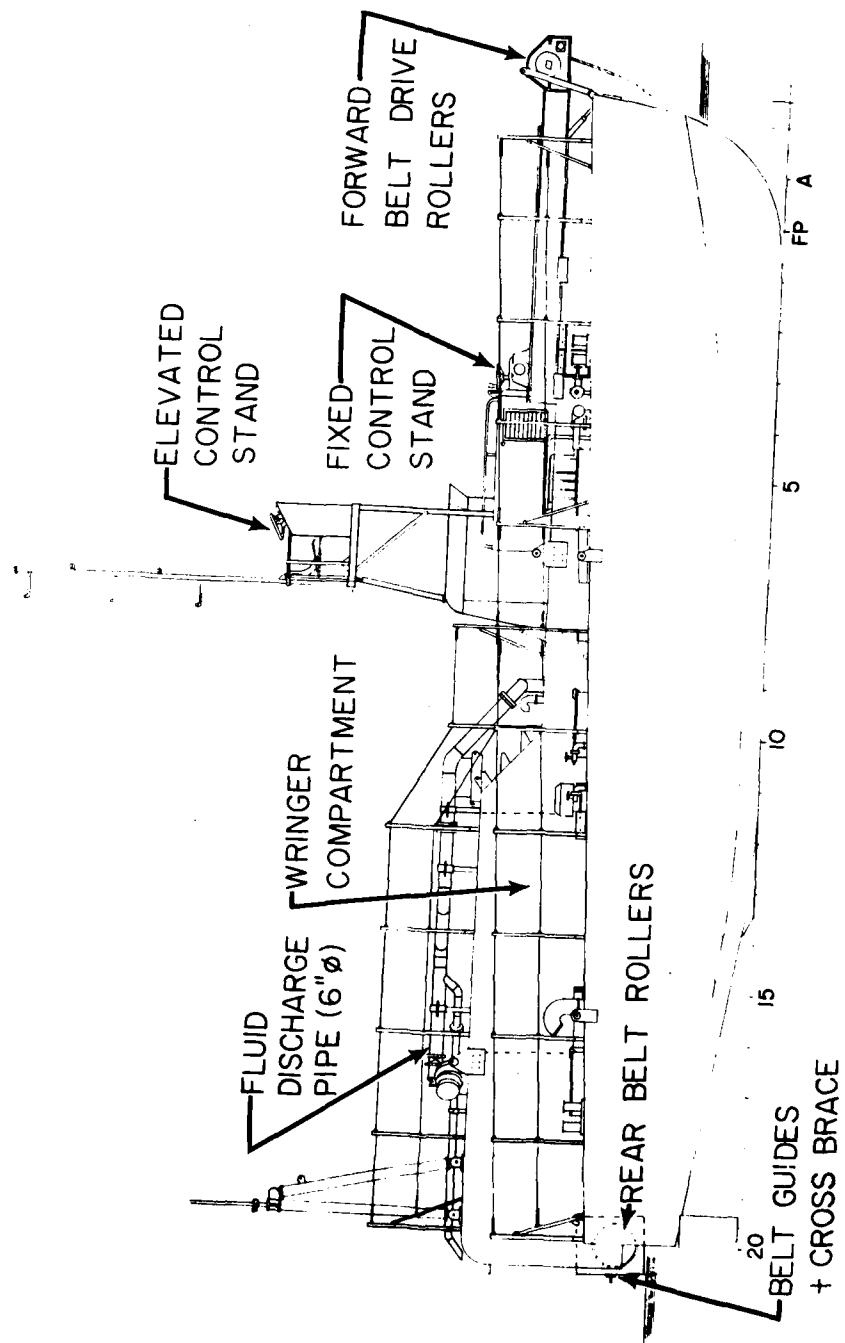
SIDE VIEW OF ZRV OIL SKIMMER.
